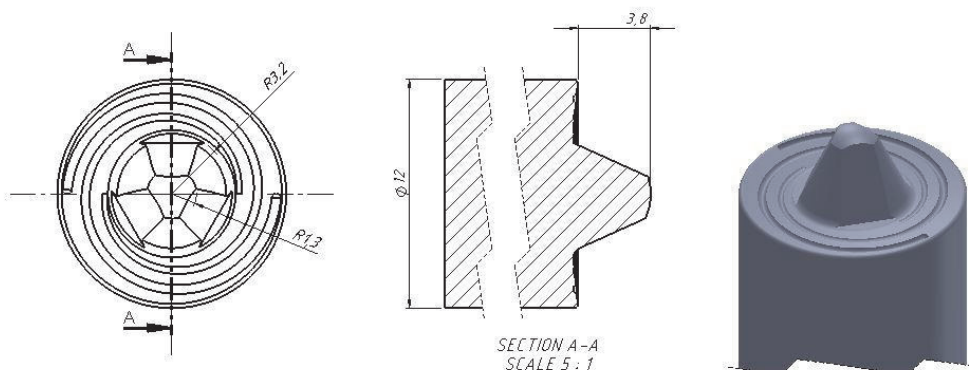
Top view of the FSW tool shoulder and tip (left), diameter of the shoulder and length of the tip (center) and isometric view of tool (right)
